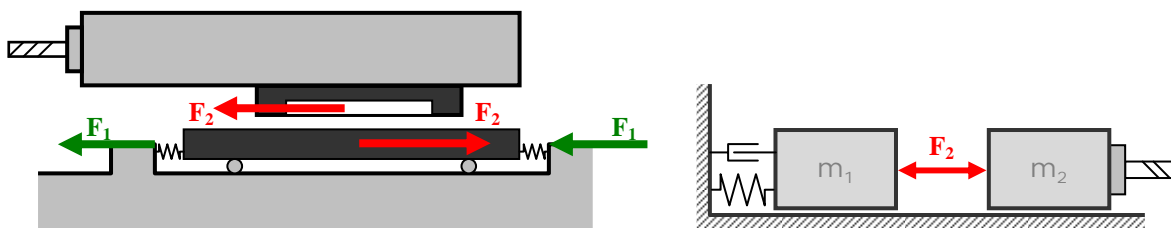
Contemporary machine tool feed drive mounting
